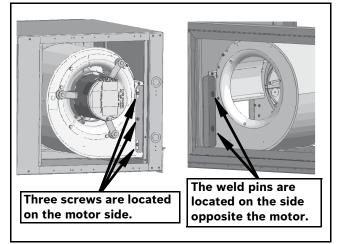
Screws and Welded Pins Locations for Horizontal Units
